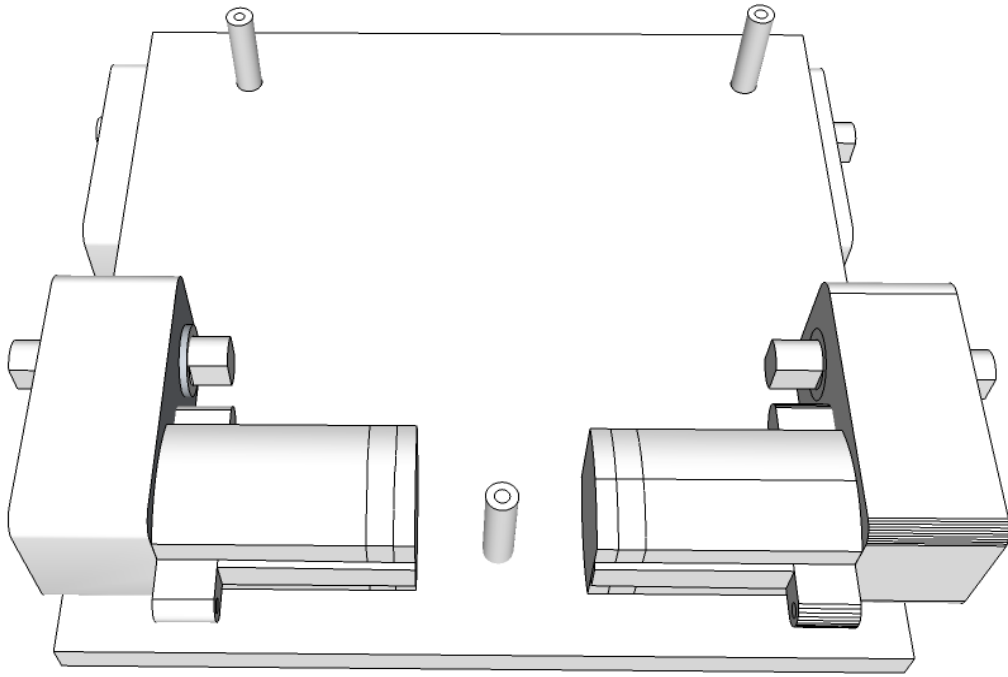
Visual of all 4 GM8 Motors Attached to the Bottom Chassis, Top View
